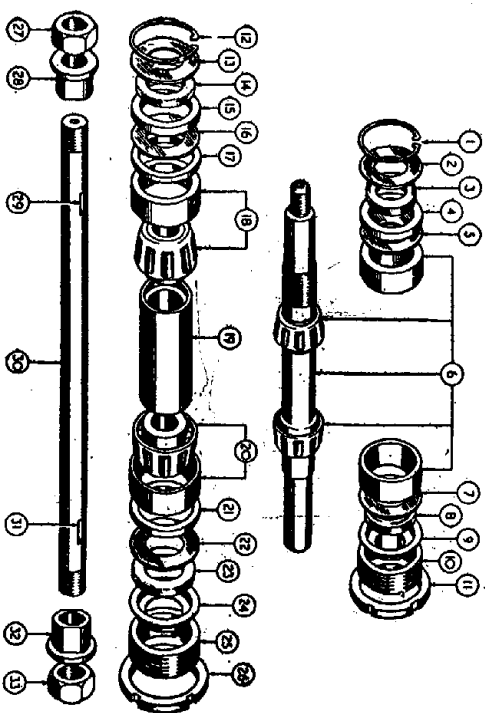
EXPLODED 1950-54 FRONT AND REAR HUB BEARINGS.
